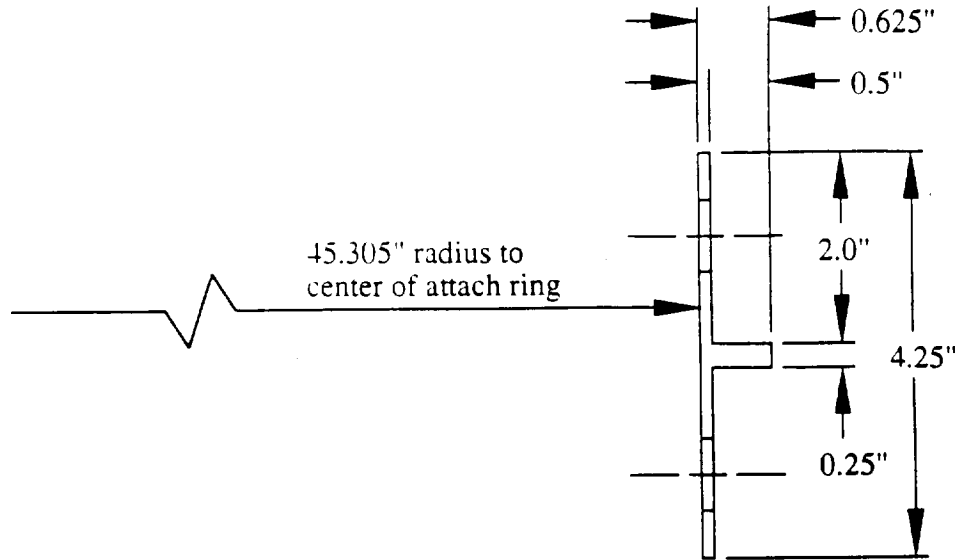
Solid Booster Fairing Attach Ring Cross Section
